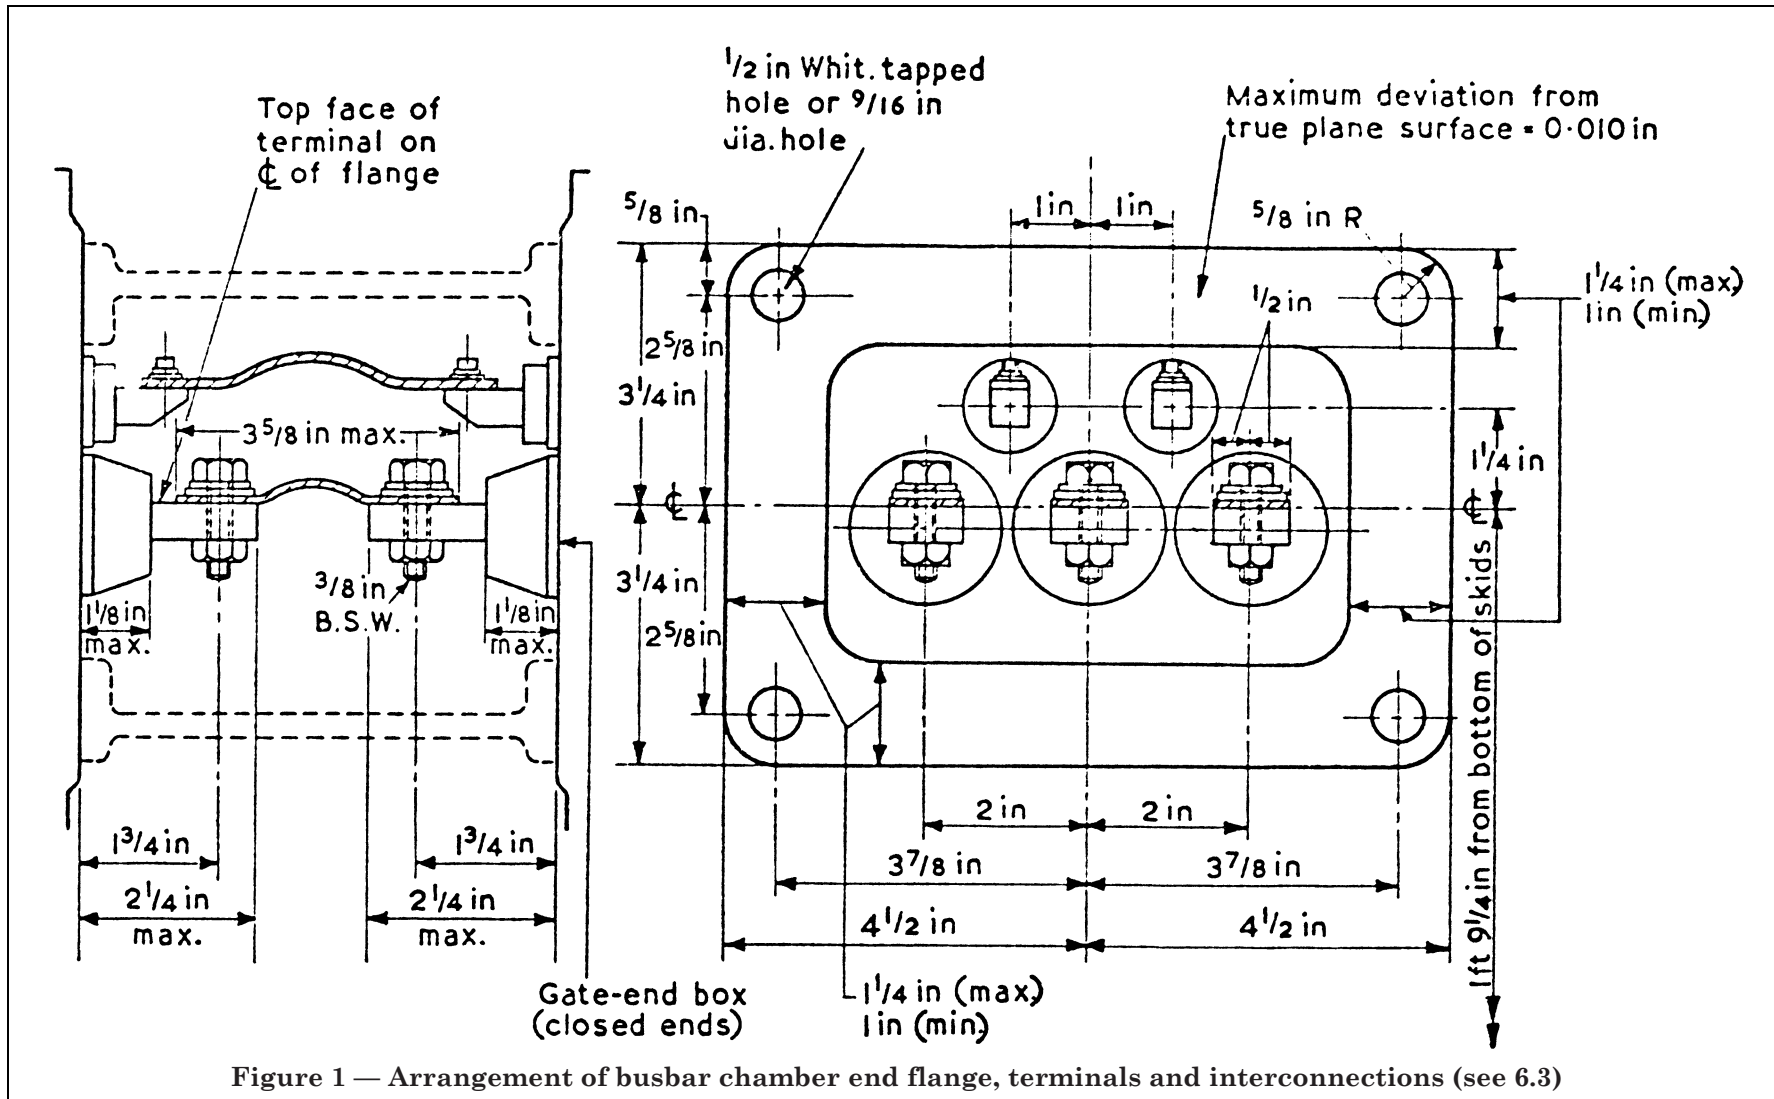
Arrangement of busbar chamber end flange, terminals and interconnections (see 6.3)
